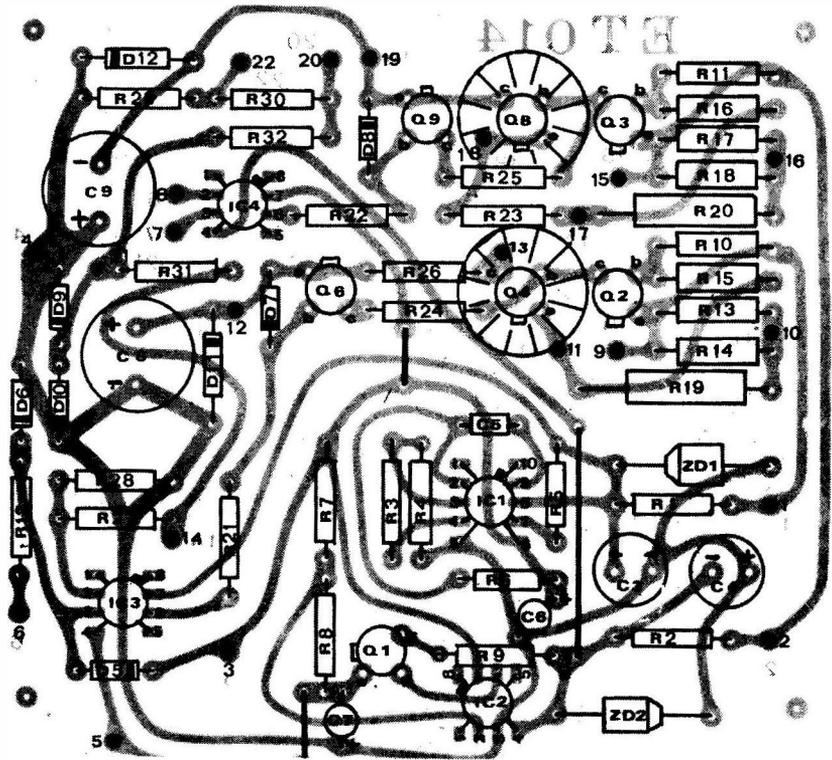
How the components are mounted on the printed circuit board. Compare this with Fig. 3.
